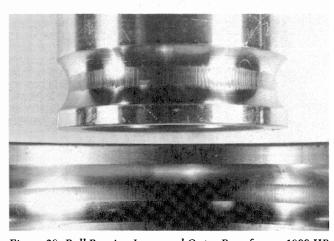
Ball Bearing Inner and Outer Race from a 1000 HP Electric Motor Showing Fluted Surface Caused by Stray Currents.
